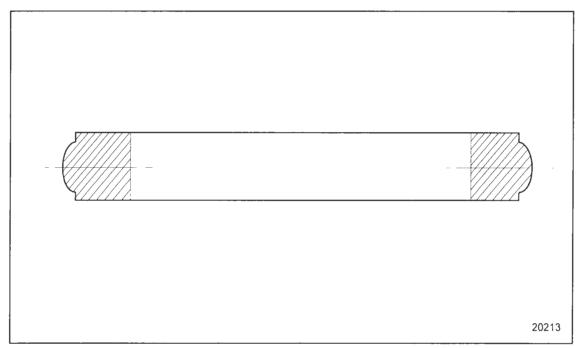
Cylinder Liner Seal Ring Cross-section
